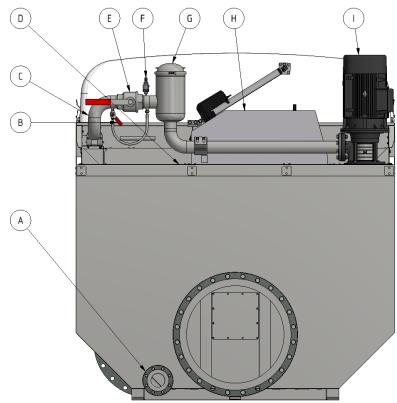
Hydrotech Discfilter in HPF2200 series type 1 (outlet side).
